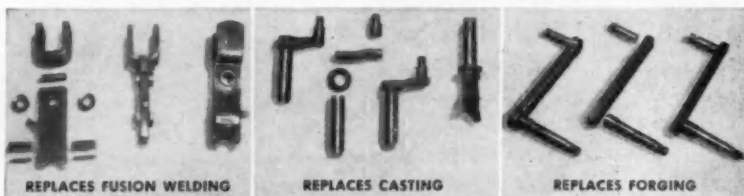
Typical assemblies resistance welded on Sciaky equipment at M-H-F.
